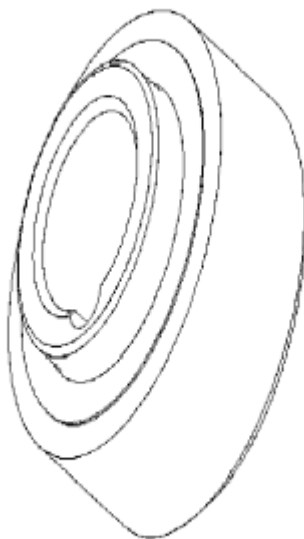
CYLINDER COMPRESSION PRESSURE ADAPTOR 8116
